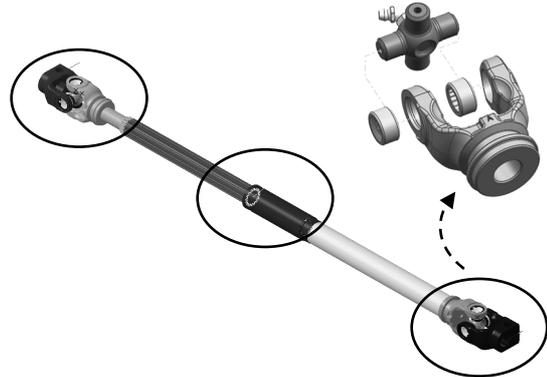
Tolerance analysis areas in steering assembly
